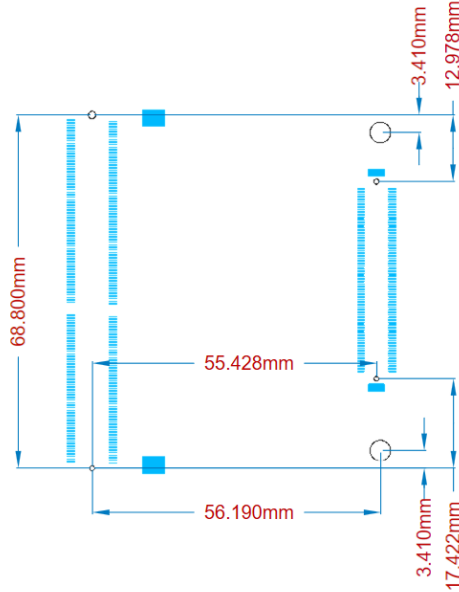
Carrier Card Edge Connector, Hirose Connector, and Mounting Hole Locations
